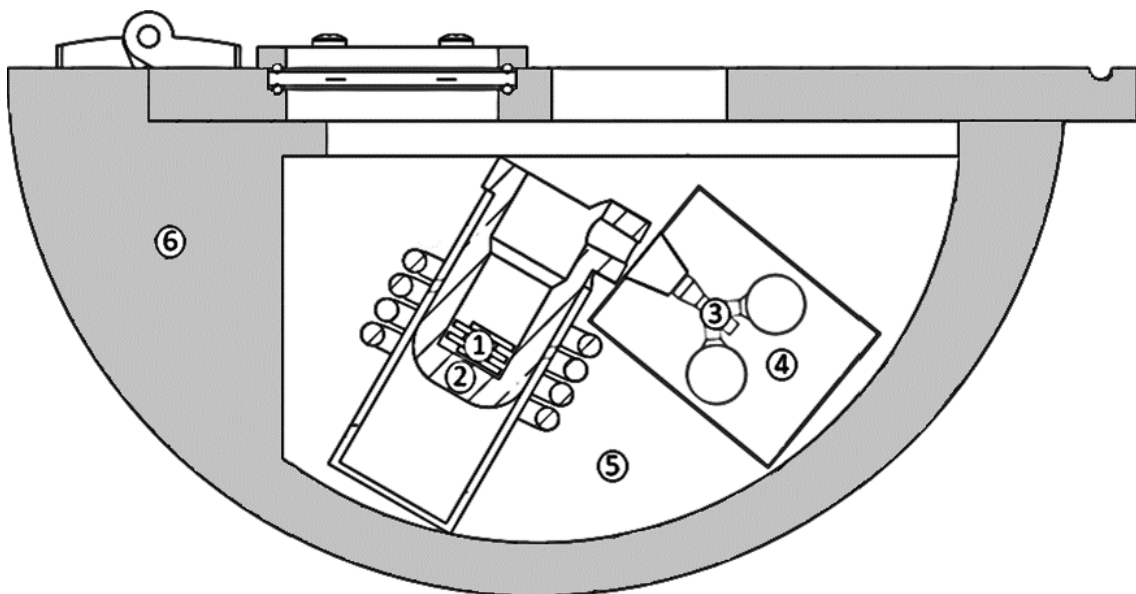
Experimental setup of vacuum-assisted casting: 1- AZ91D-1 wt.% CaO; 2- crucible; 3- cavity of the assembled model; 4- plaster molding; 5- vacuum atmosphere, and 6- furnace.
